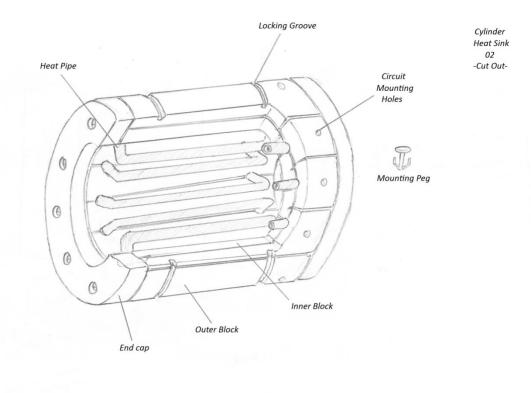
Cutout sketch of the bulb design (Design 1). Note that the cylinder is oriented horizontally in this sketch, whereas in the actual configuration it will be oriented vertically to facilitate upward airflow.
